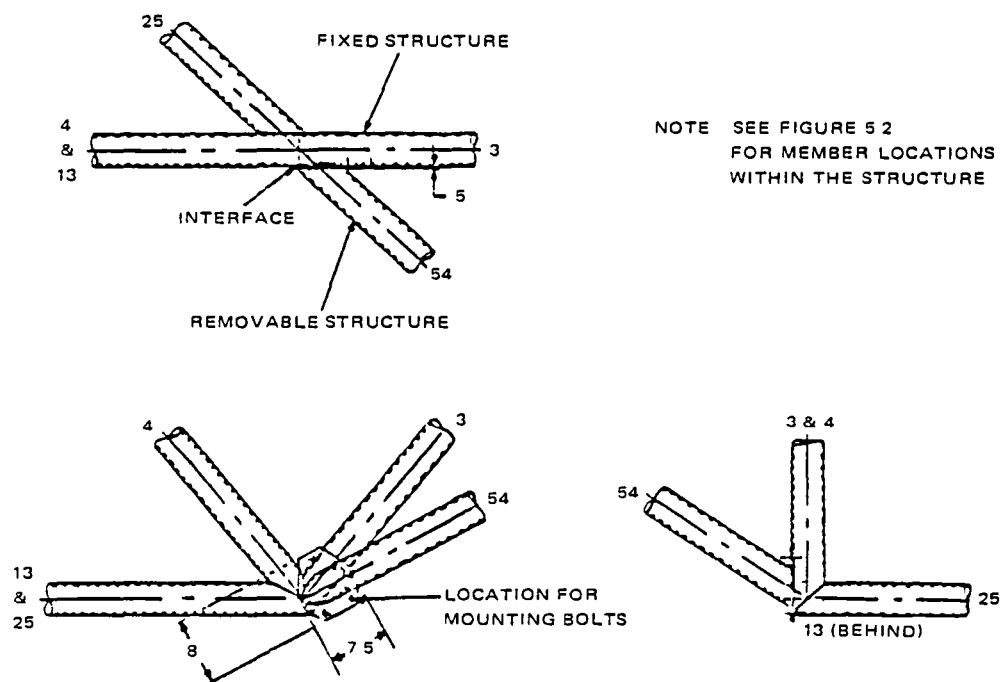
Typical Interface Fitting in the Modular Support Structure
